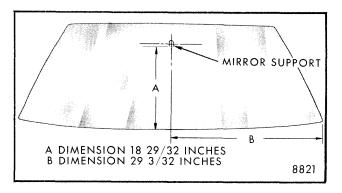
Locating Bonded Rear View Mirror Support on Glass
